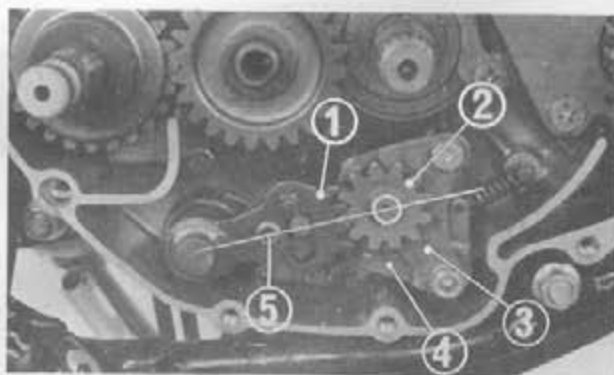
(1) Gearshift arm (2) Drum shifter (3) Drum plate
